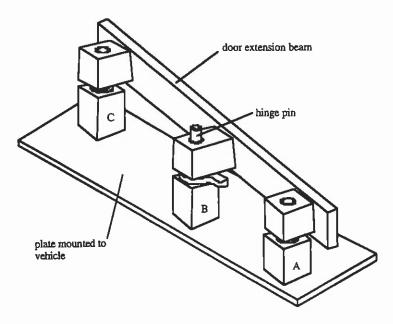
Drawing of three-pivot mechanism used to simulate production and four-bar mechanism door hinge scenarios. The drawing shows the hinge pin in the "B" position.
